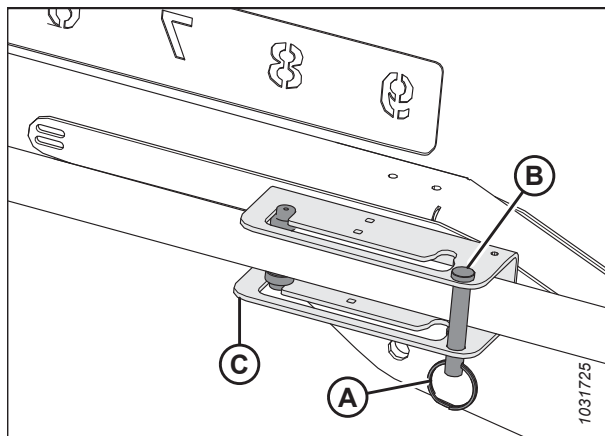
Fore-Aft Cylinder Adjustment Type 2 – Forward Position
